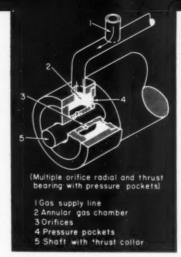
Pressure pockets in this radial and thrust bearing prevent the gas orifices from being smeared shut should the shaft and bearing surfaces rub.
